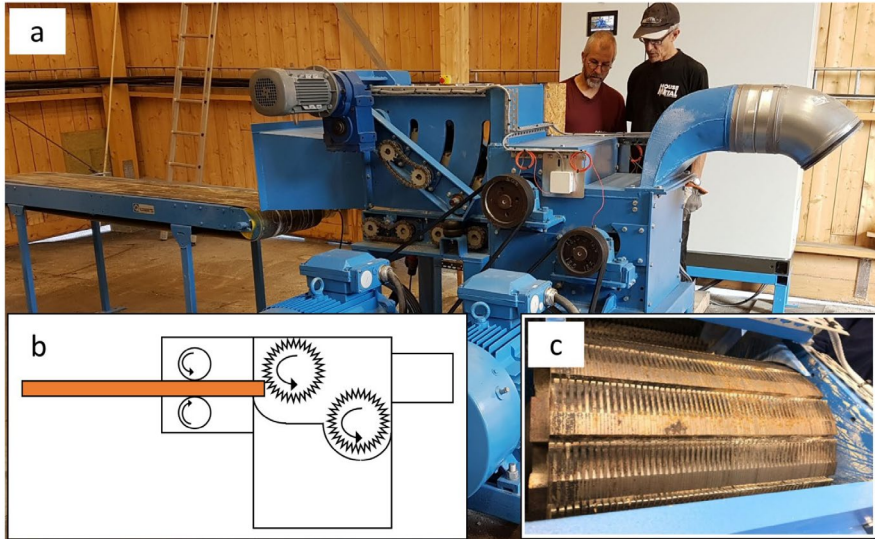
(a) The prototype multi-blade shaft mill (MBSM) without its housing enclosure. The roller table, feeder and the two shafts connected to the motors are visible. The sample collector is not fitted to the outlet in the photograph. (b) The principle of operation of the MBSM and (c) the multi-blade shaft (Paper I).
